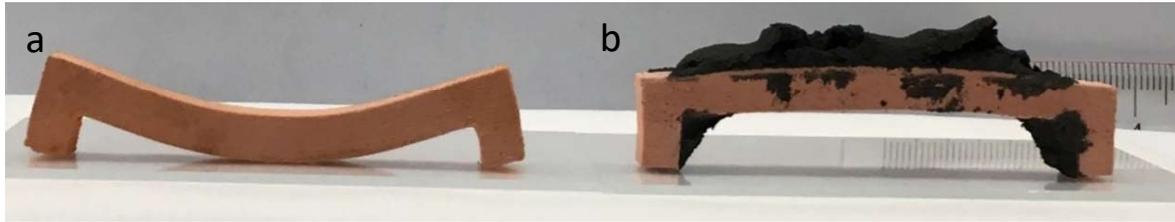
Sintered part in simply supported beam configuration part with 50 mm span (a) without coating and (b) with coating retained its shape without sag. (Note: 1 div = 1 mm on the ruler)
